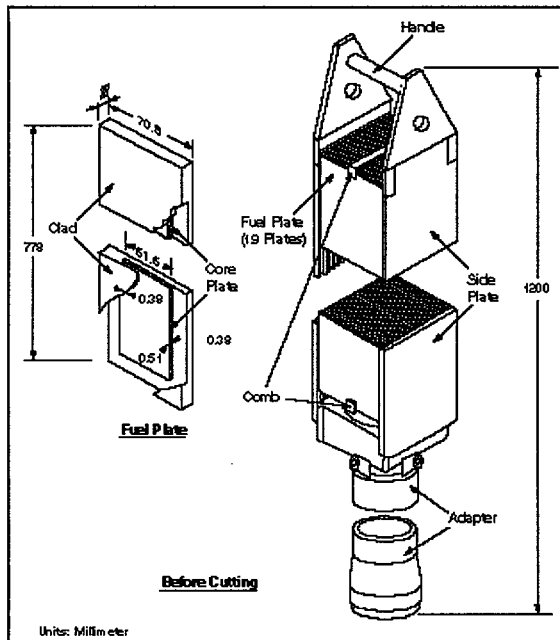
Typical Materials Test Reactor fuel assembly.
